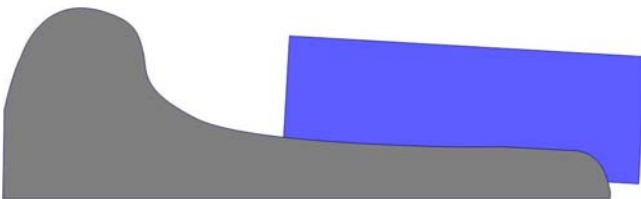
Brake Shoe Contact with Tread with Worn Flange
